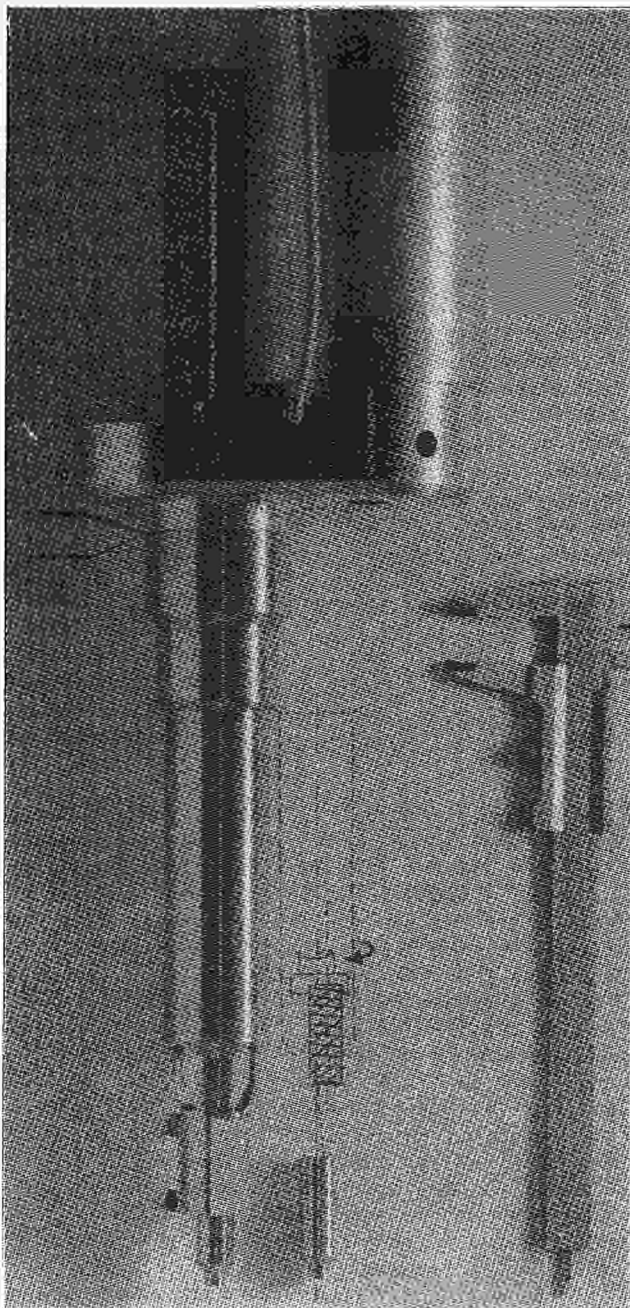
The new identity tool with no prolongers. The transducer holder extension is seen fitting to a seal.
